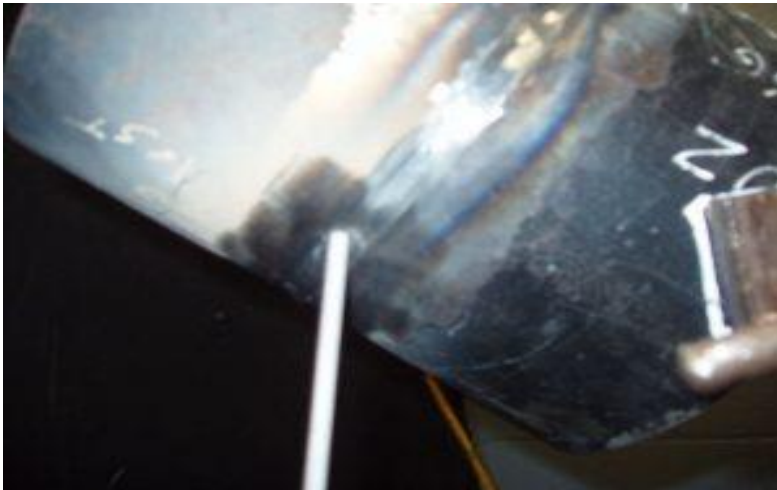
the angle used to get the other side of the weld joint. The angle is same all around the pipe no matter what position. Just point the rod to the center of the pipe in the flat, horizontal, vertical and overhead positions.
